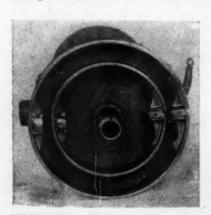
DETAILS OF ONE OF THE UNIVERSAL JOINTS.
